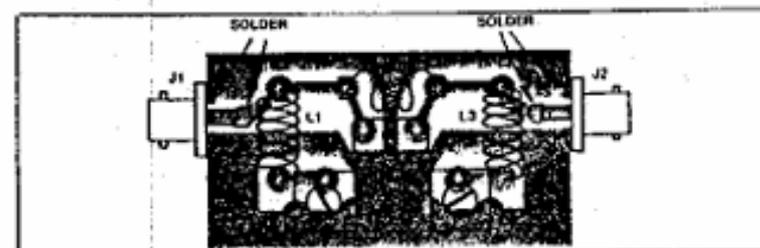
Parts-placement guide for the filter. The shaded area represents an X-ray view of the copper pattern. The two BNC connectors are each soldered to the board in three places as shown.
